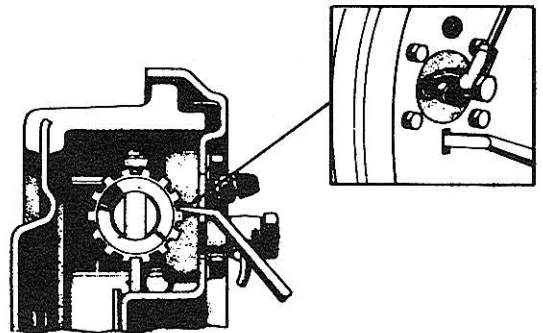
Brake Shoe Clearance Adjustment G2464
